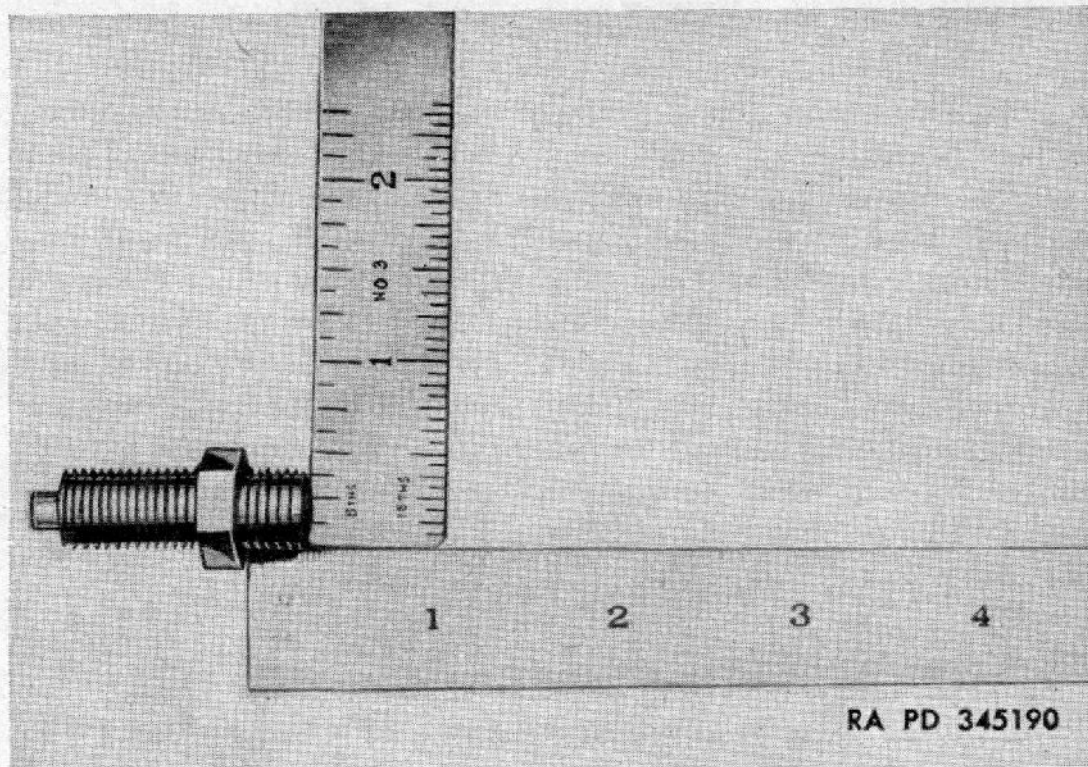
Measuring distance between lock nut and end of adjusting screw.
